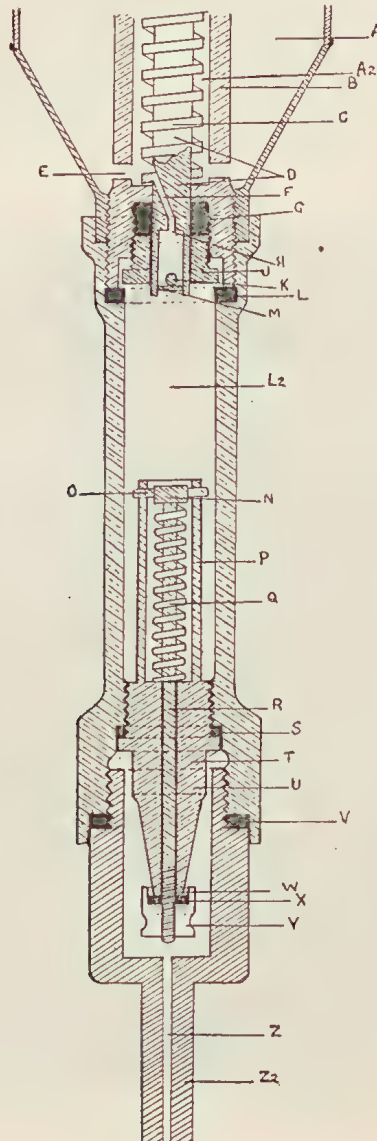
Internal mechanism of Danks' Hand-Injector, showing positions of washers, springs, valves, delivery passage, &c.
